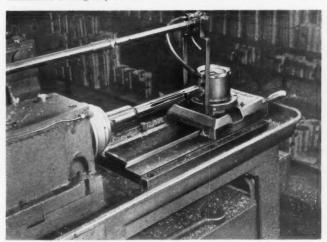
Special Ford reaming machine for finishing gudgeon pin holes
